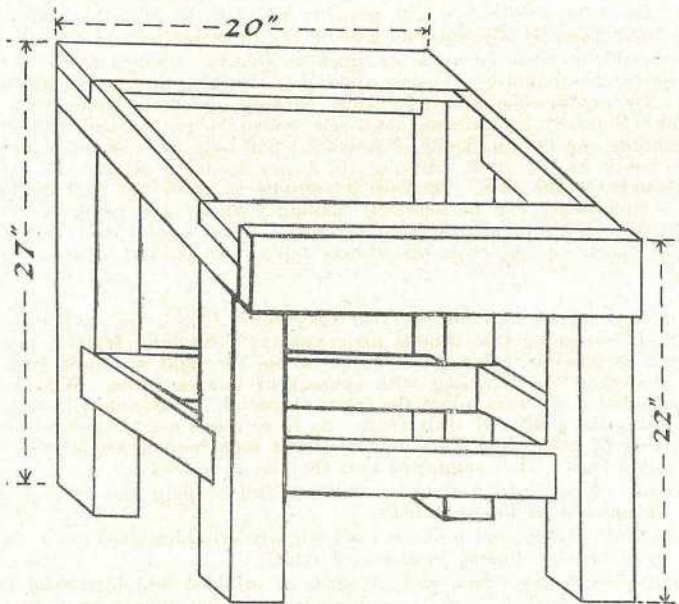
PACKING STAND TO HOLD TWO CASES.
